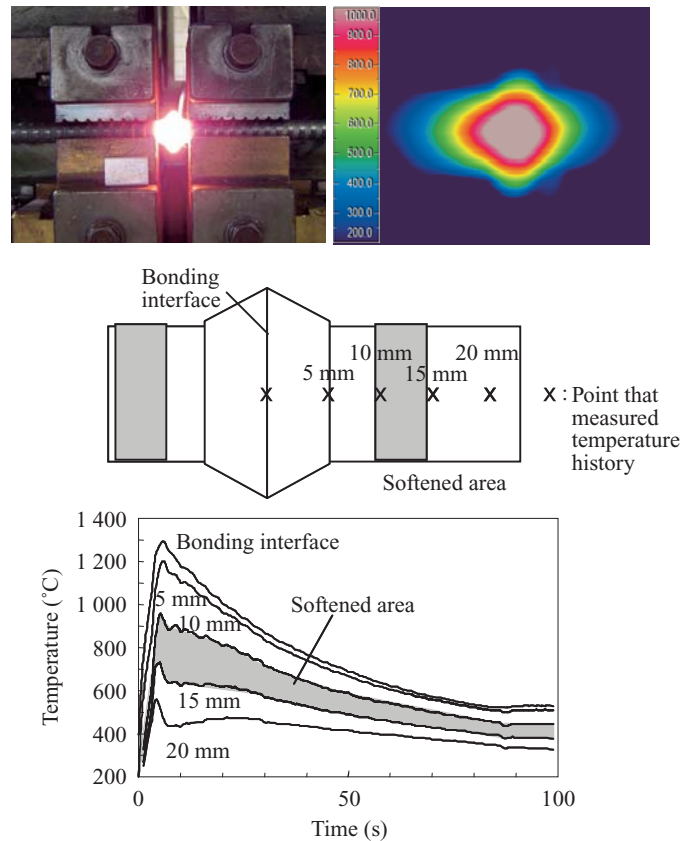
Heat cycle during welding of shear reinforcement
